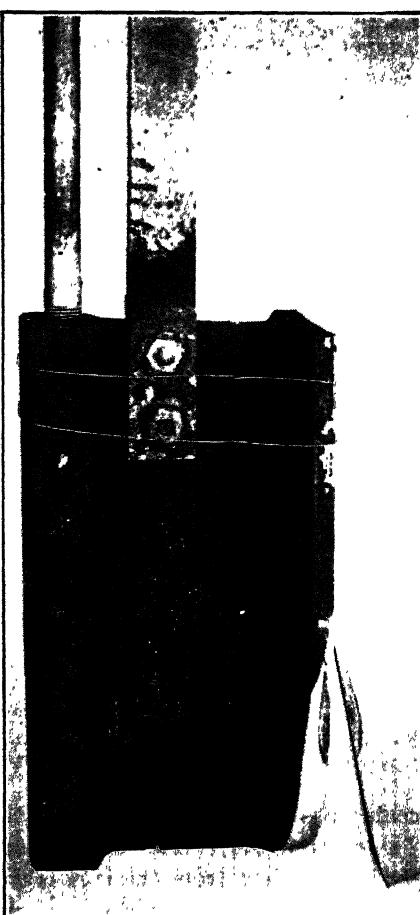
RAIL SECTION AFTER QUENCHING IN WATER, SHOWING FRACTURE.
